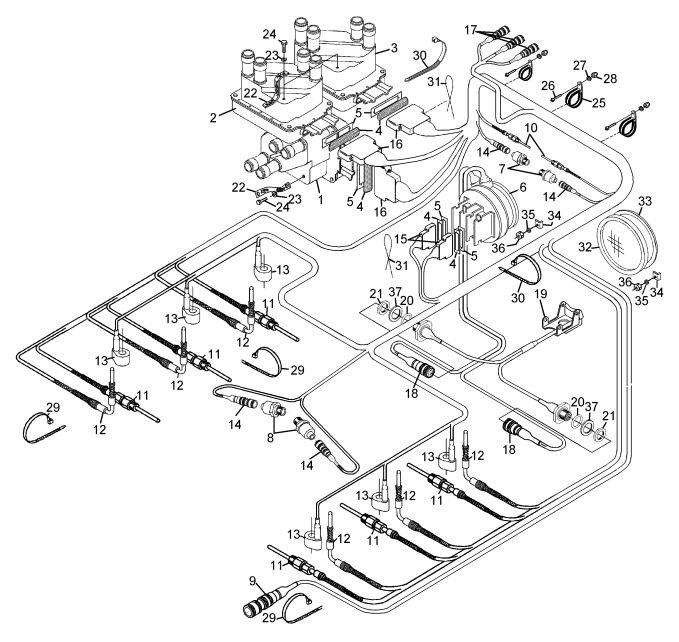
Typical 6-Cylinder Engine Electrical Control and Low Voltage Harness
